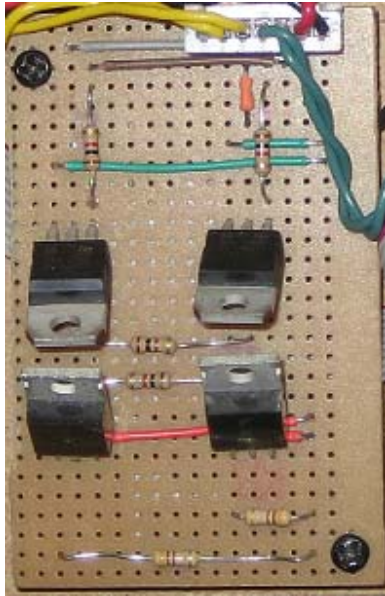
, OUR SOLUTION TO DC MOTOR DRIVER
